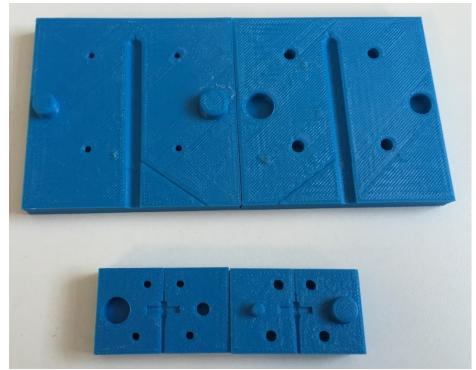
3D Printed Casting Moulds for Steerable Bougie Tips
